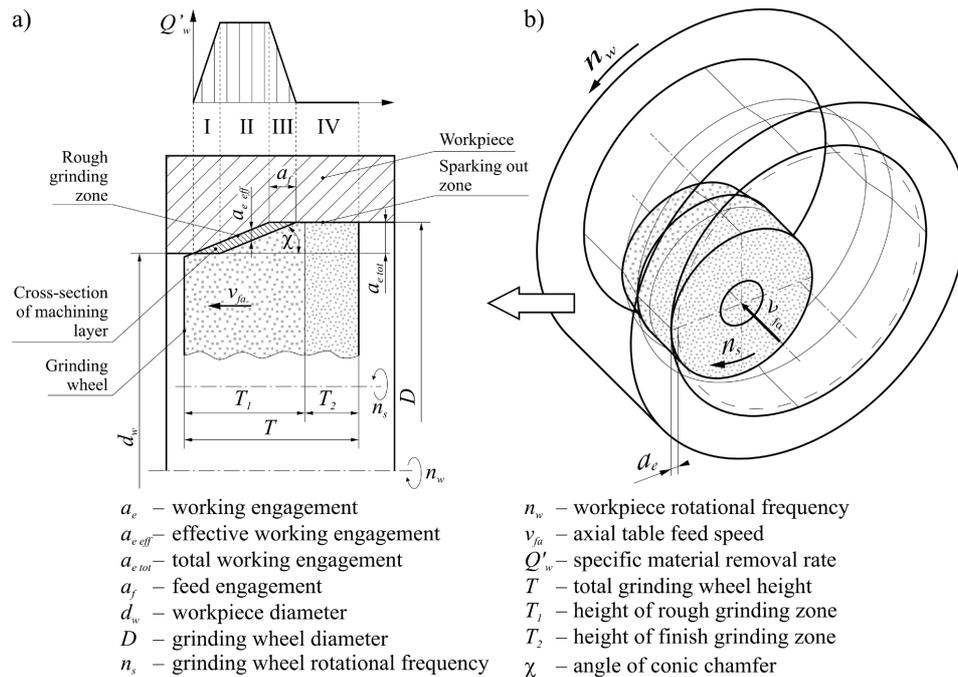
Single-pass internal cylindrical grinding using grinding wheels with zone-diversified structure: a) load of grinding wheel active surface, b) kinematics of grinding [1, 2]
